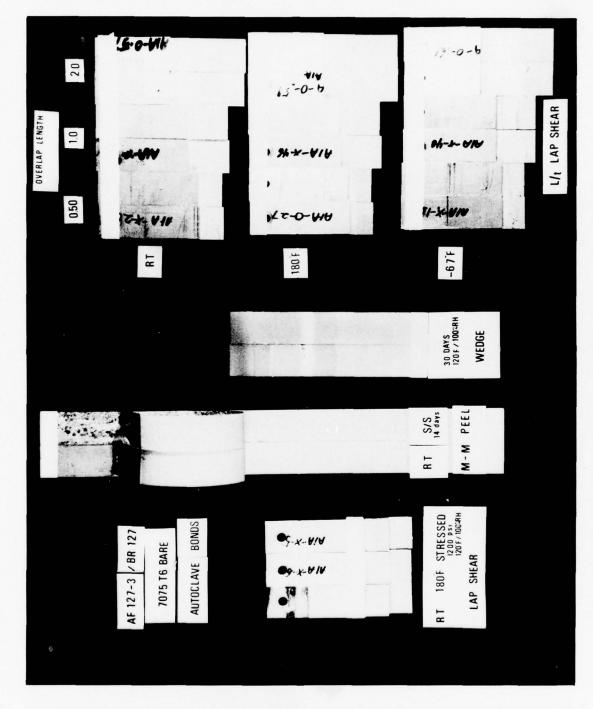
Specimen Failure Surfaces—AF 127-3, Optimized FPL Etch, Autoclave Bonds
